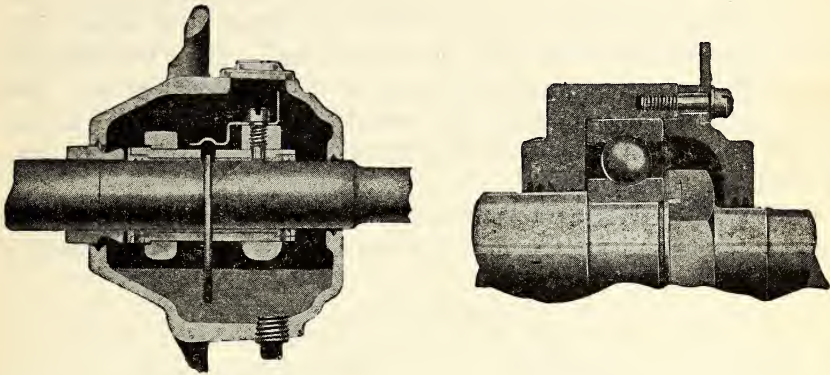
On the left is shown a cross-section of a sleeve bearing with the oil ring hanging in the lubricating oil. As the shaft turns, oil is carried up onto the shaft by the ring and flows into the bearing. On the right is shown a cross-section of a ball bearing.
